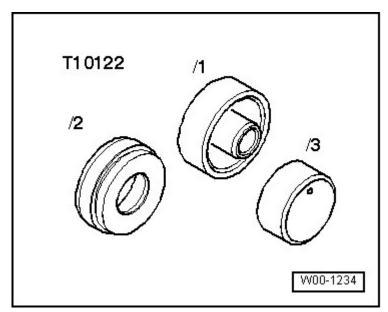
Identifying Installation Tool T10122 Courtesy of AUDI OF AMERICA, LLC
